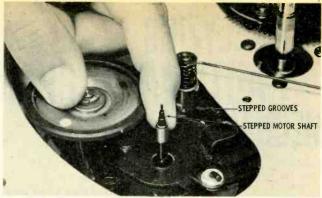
Stepped motor shaft for changing speeds. Note idler plate raised and lowered by moving over stepped grooves.
